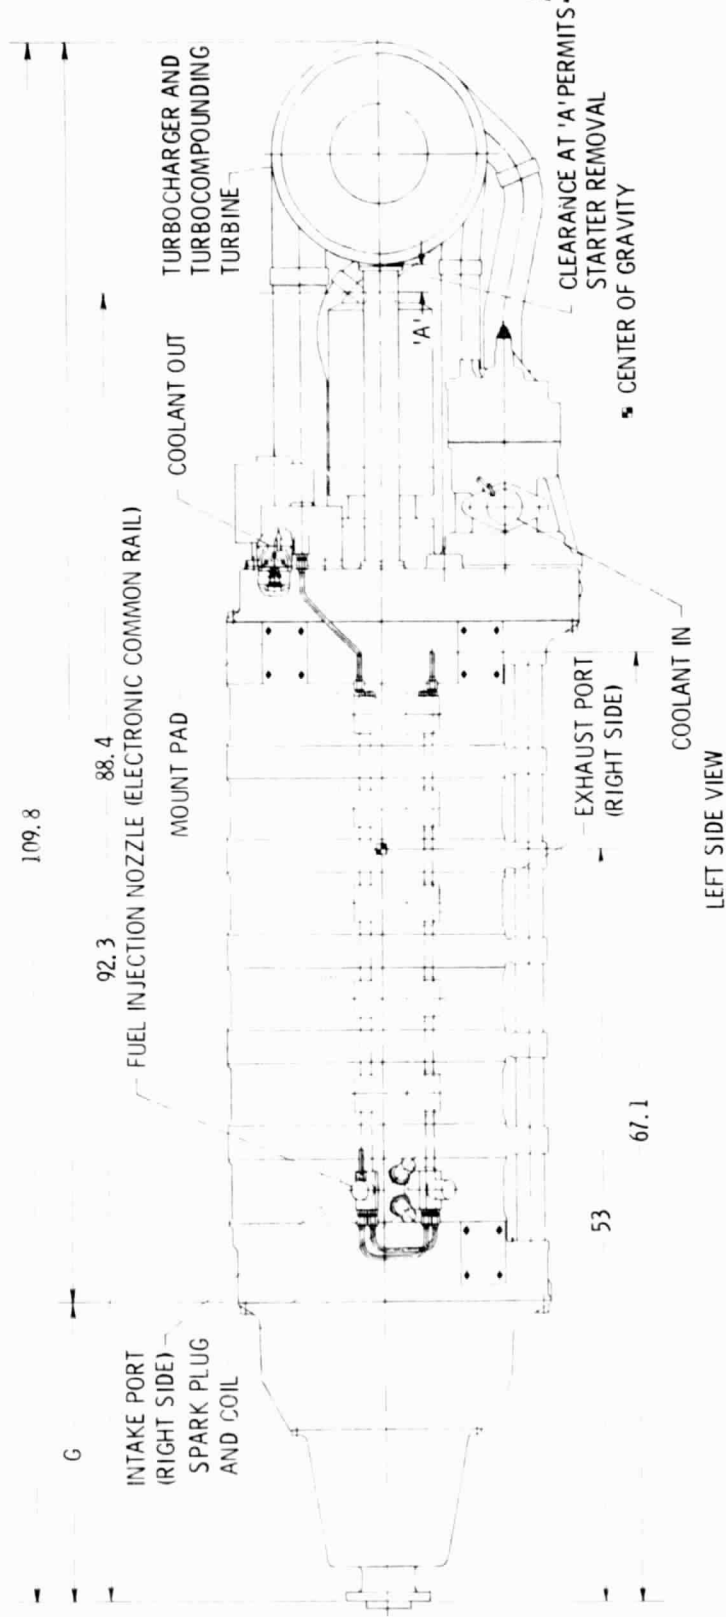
Installation drawing of highly advanced rotary combustion aircraft engine - 2500 hp. (End view is a circle of 26 in. diameter. For dimension G see gear reduction curve configuration shown for 1500 propeller rpm.)
